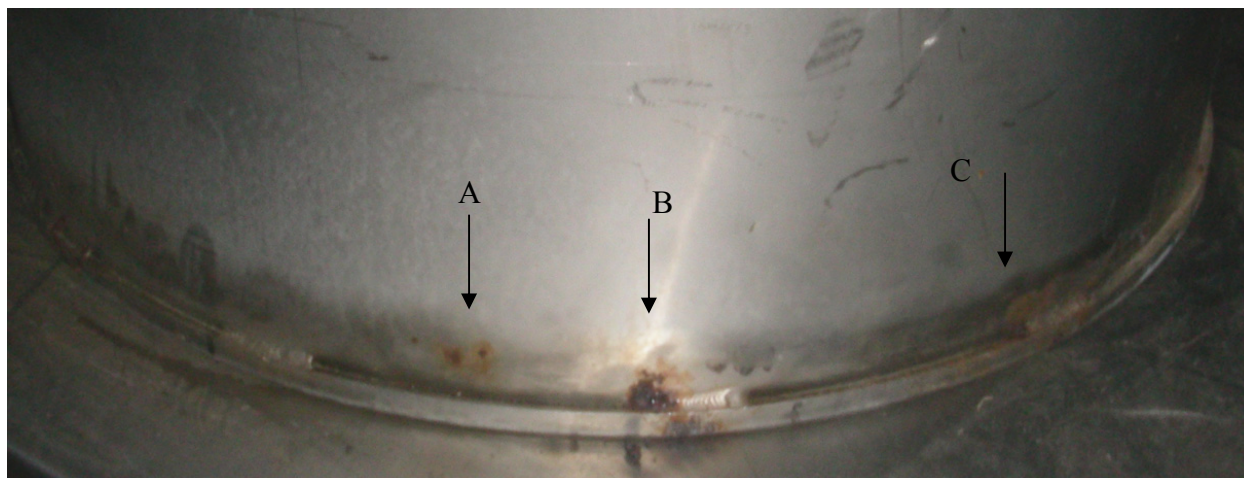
LE1 drum outer surface showing corrosion on (B, C) and near (A) the bottom stitch welds after 92 weeks conditioning.
